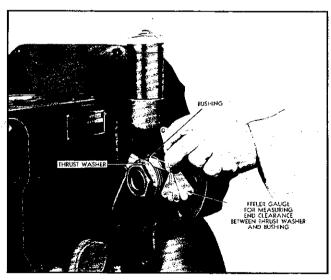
Checking End Clearance of Blower Drive Gear Assembly.
